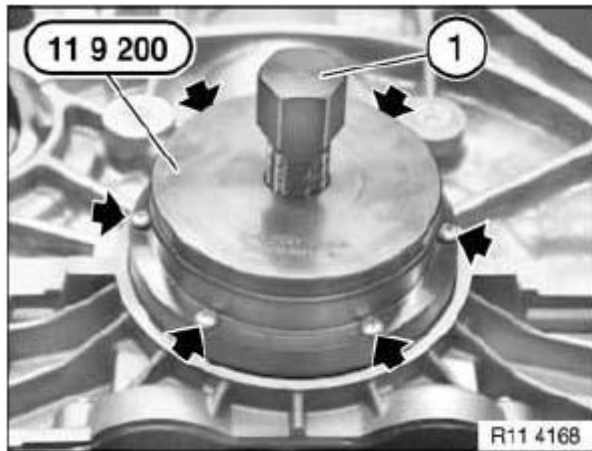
Identifying Special Tool (11 9 200) And Crankshaft Radial Seal Spindle
